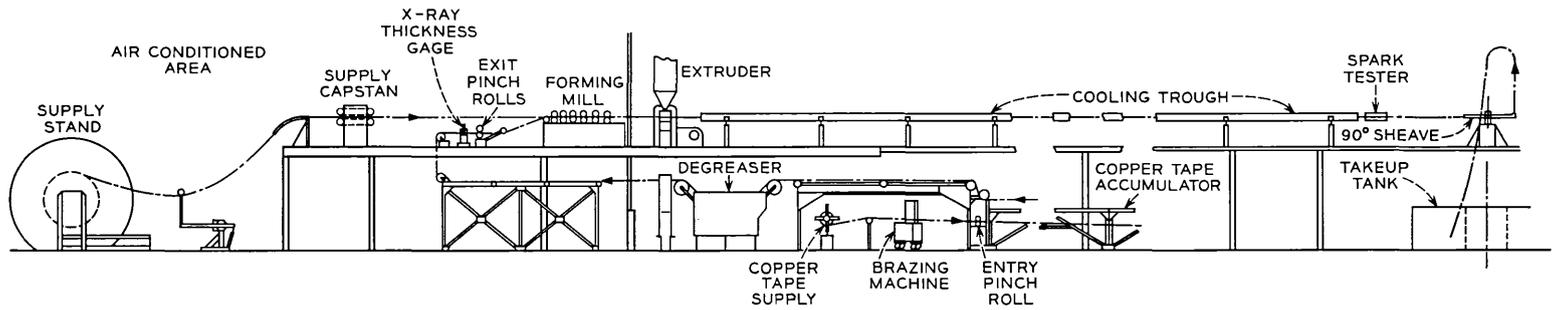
Elevation of outer conductor forming and jacketing line.
